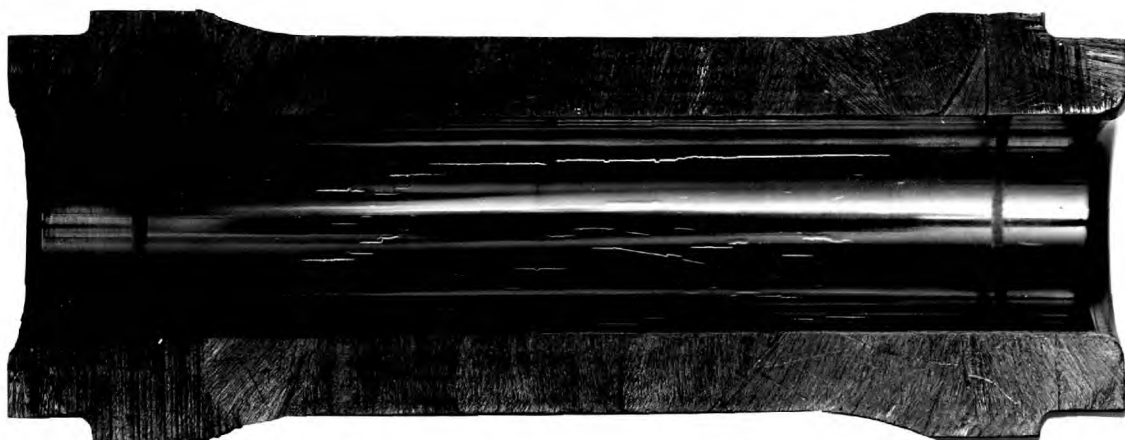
(a) Bore Cracks in Specimen No.16.
